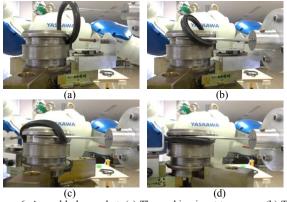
Assembly by a robot. (a) The packing is set to groove. (b) The tool is set to groove. (c) The chuck is rotated, and the packing is inserted. (d) The packing assembly is finished.
